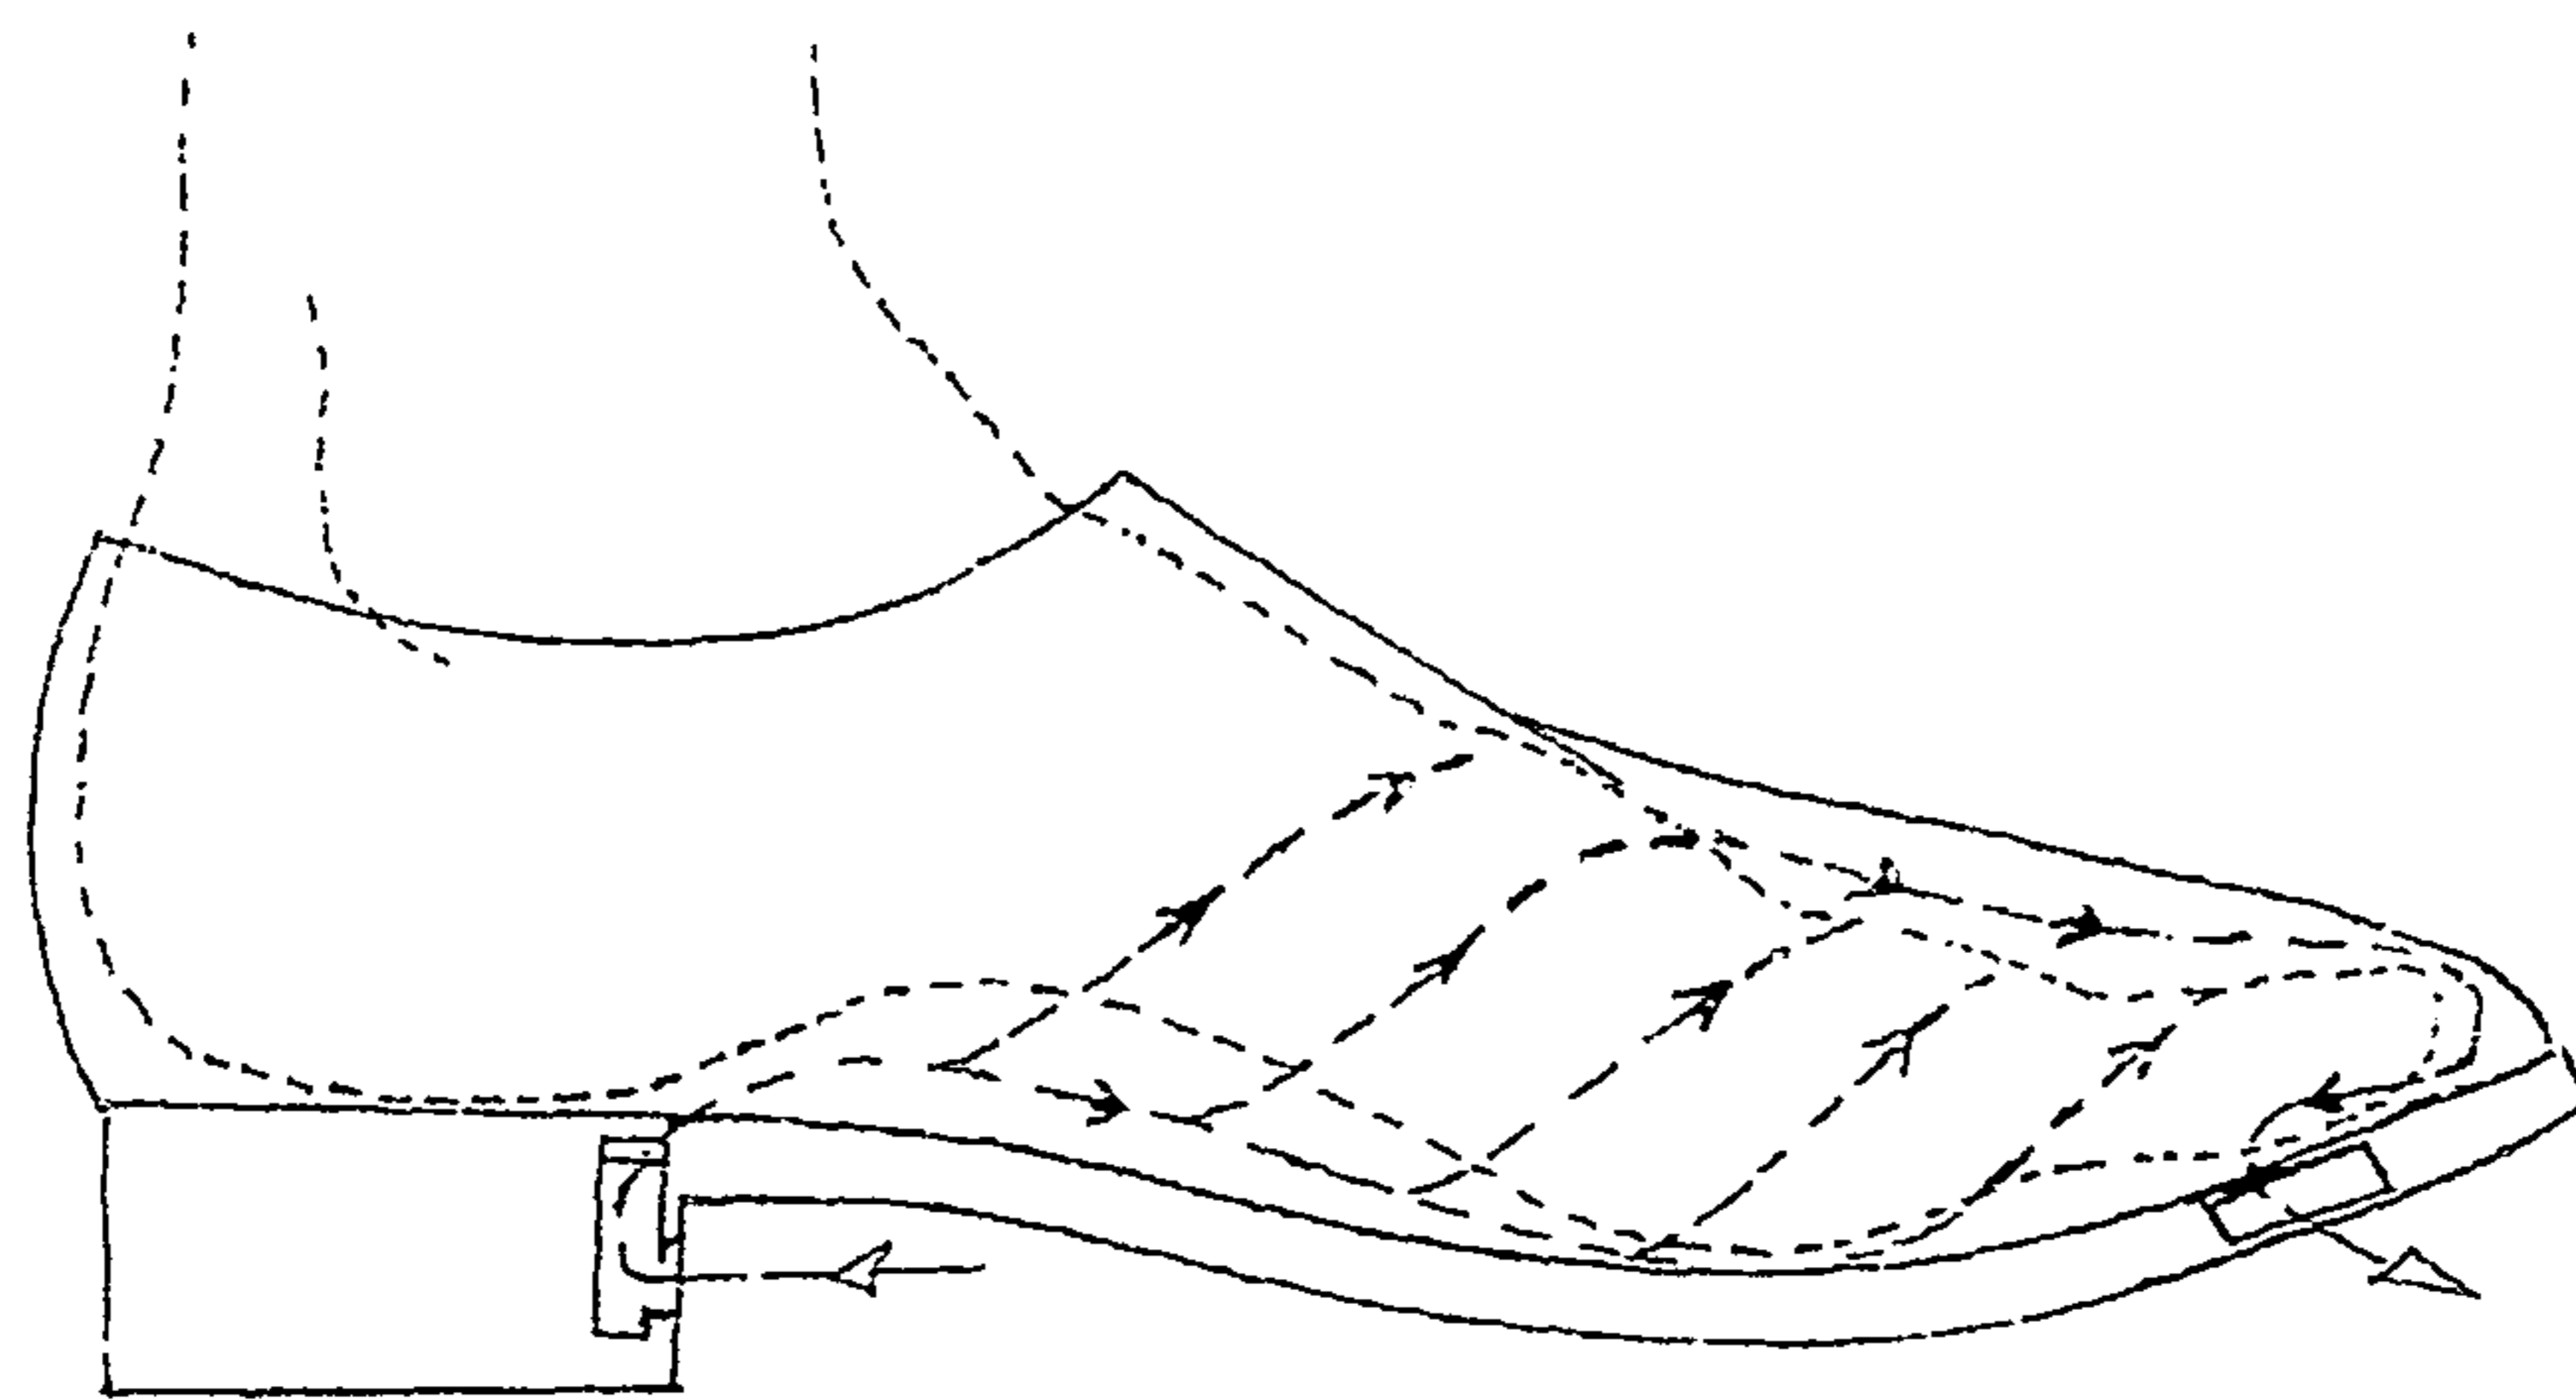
Side elevation view with typical air pathway showing example of air inlet and a possible exhaust outlet
